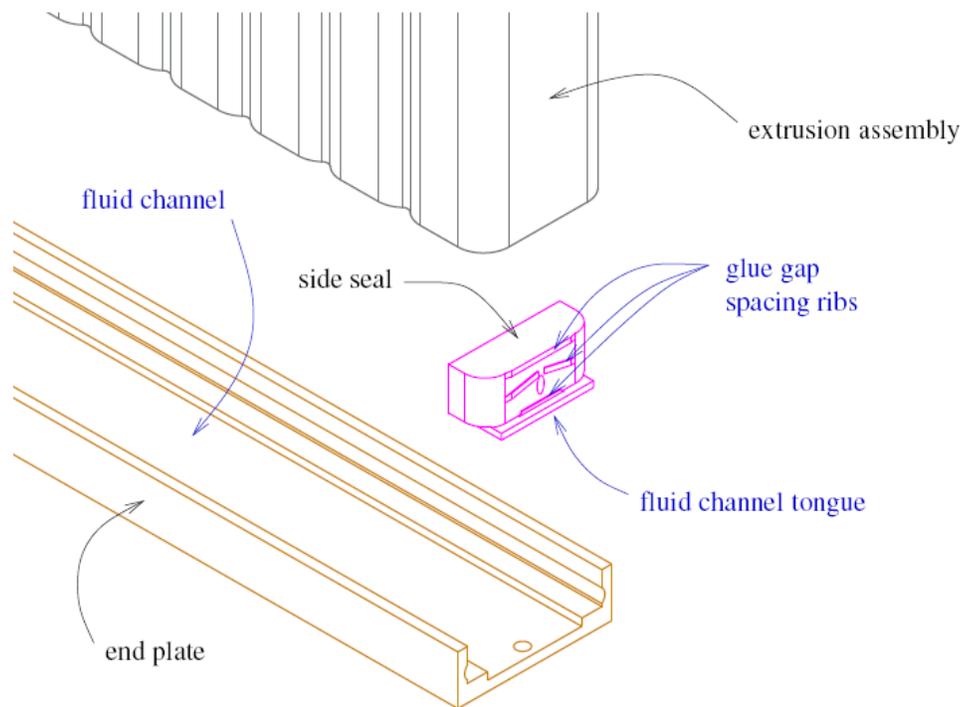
Exploded view of a close-up an end plate assembly in the region of a side seal. The side seal enables sealing the last cell in an extrusion without extending the end plate past the edge of an extrusion assembly.
